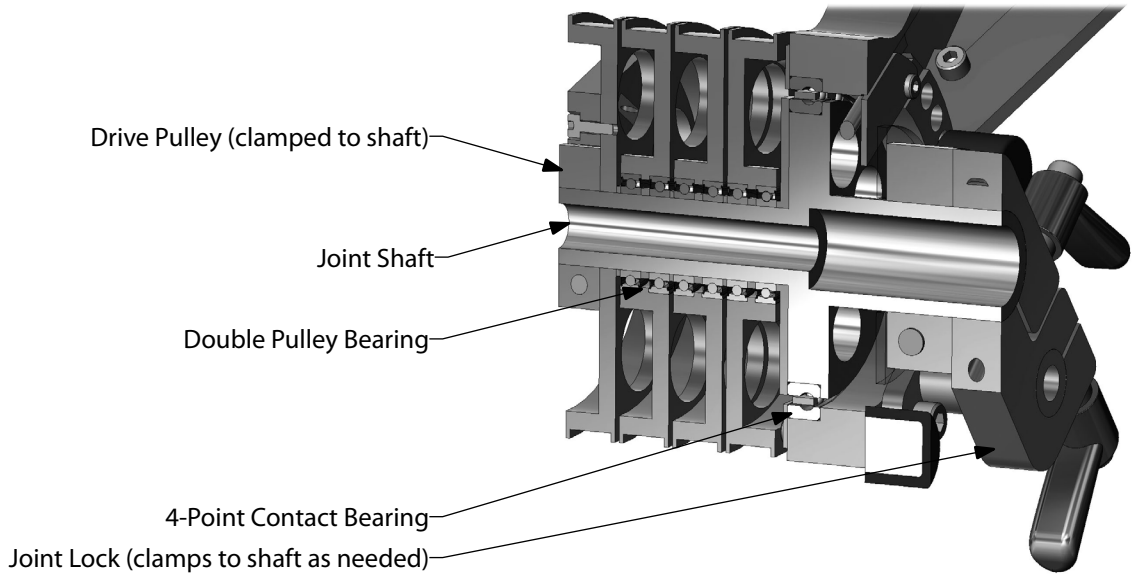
The section view shows the detail of the joint construction. The joint bearing and the free pulley bearings are clearly illustrated.
